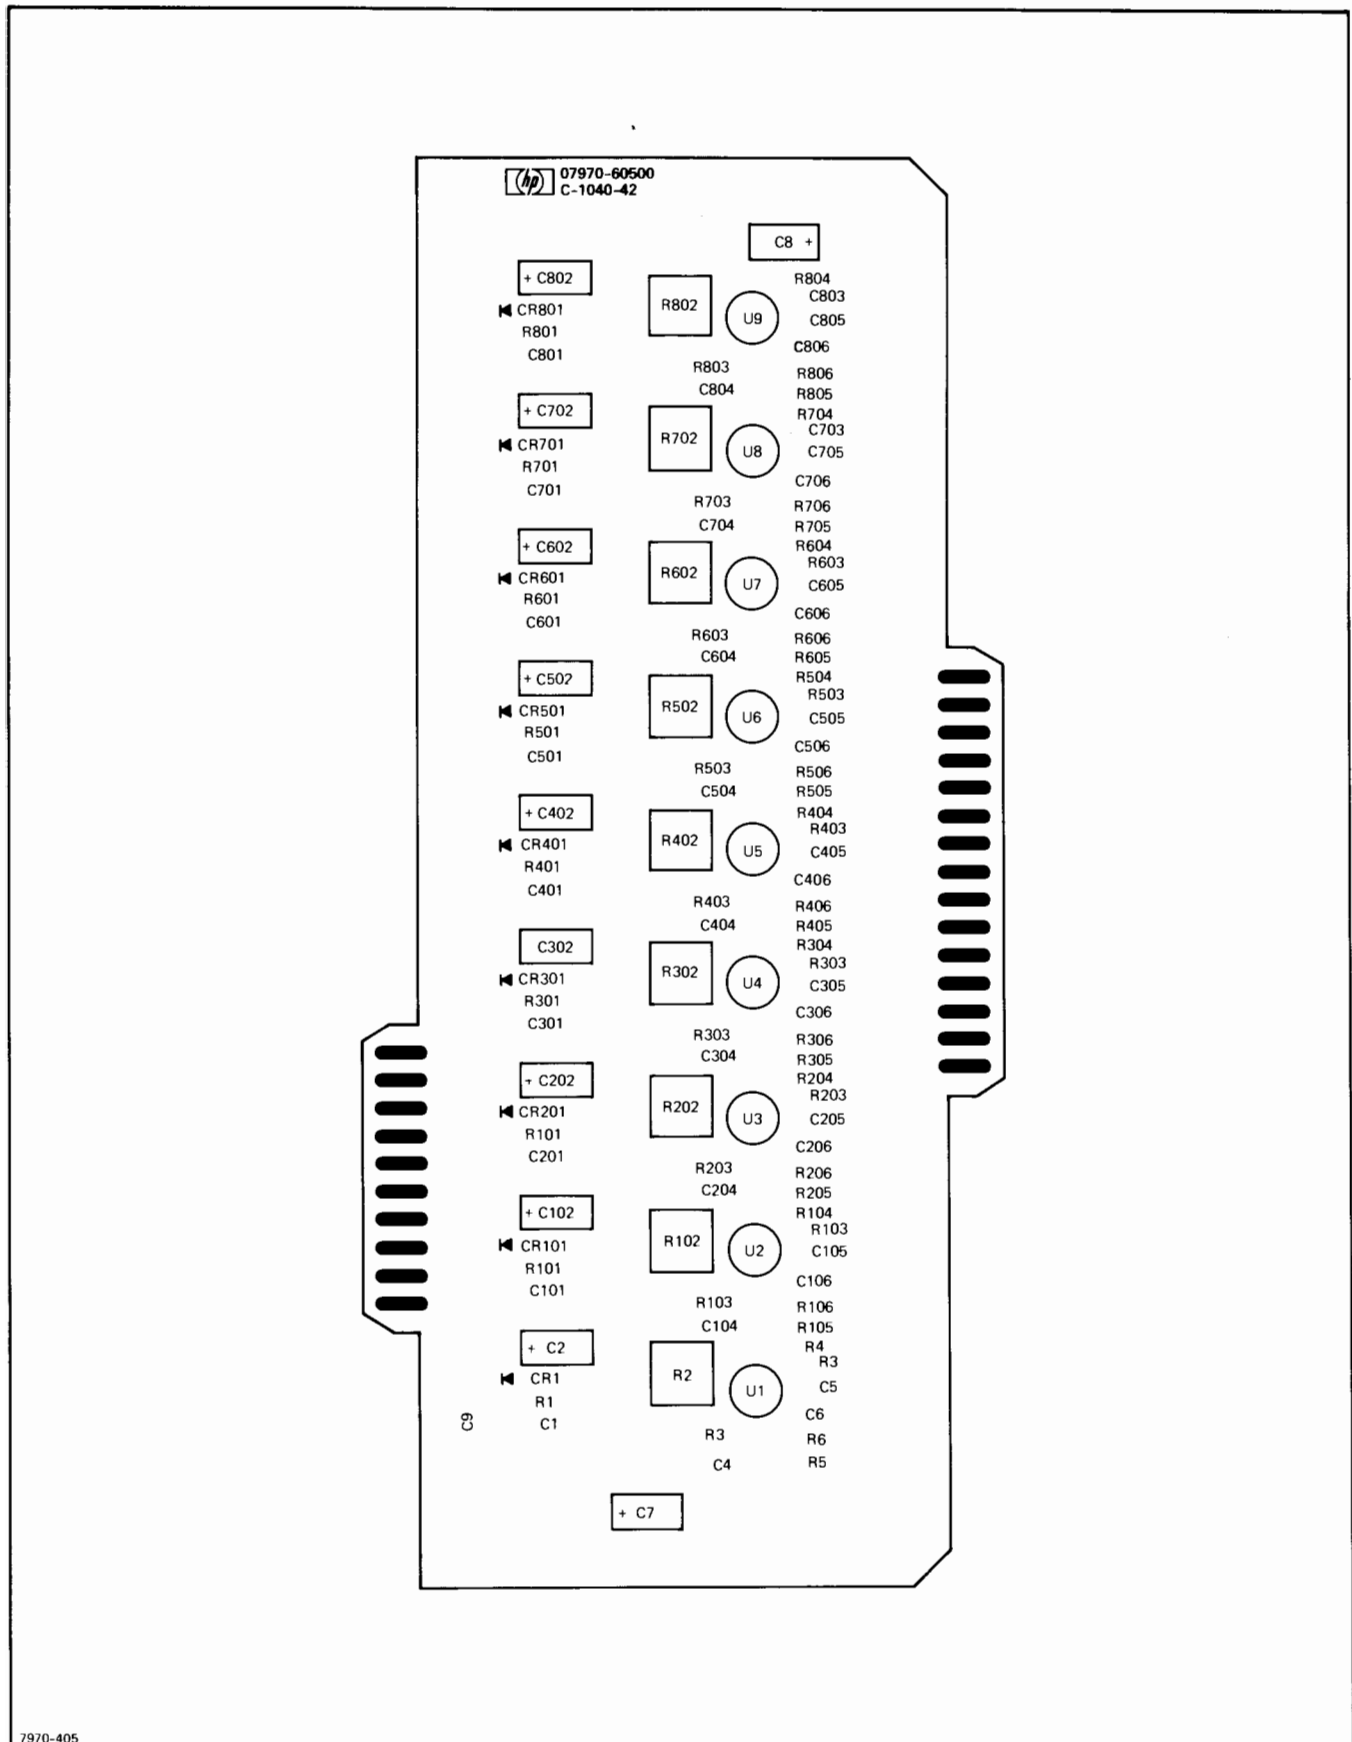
Read Preamplifier PC Assembly A15, Parts Location Diagram (Sheet 1 of 2)
